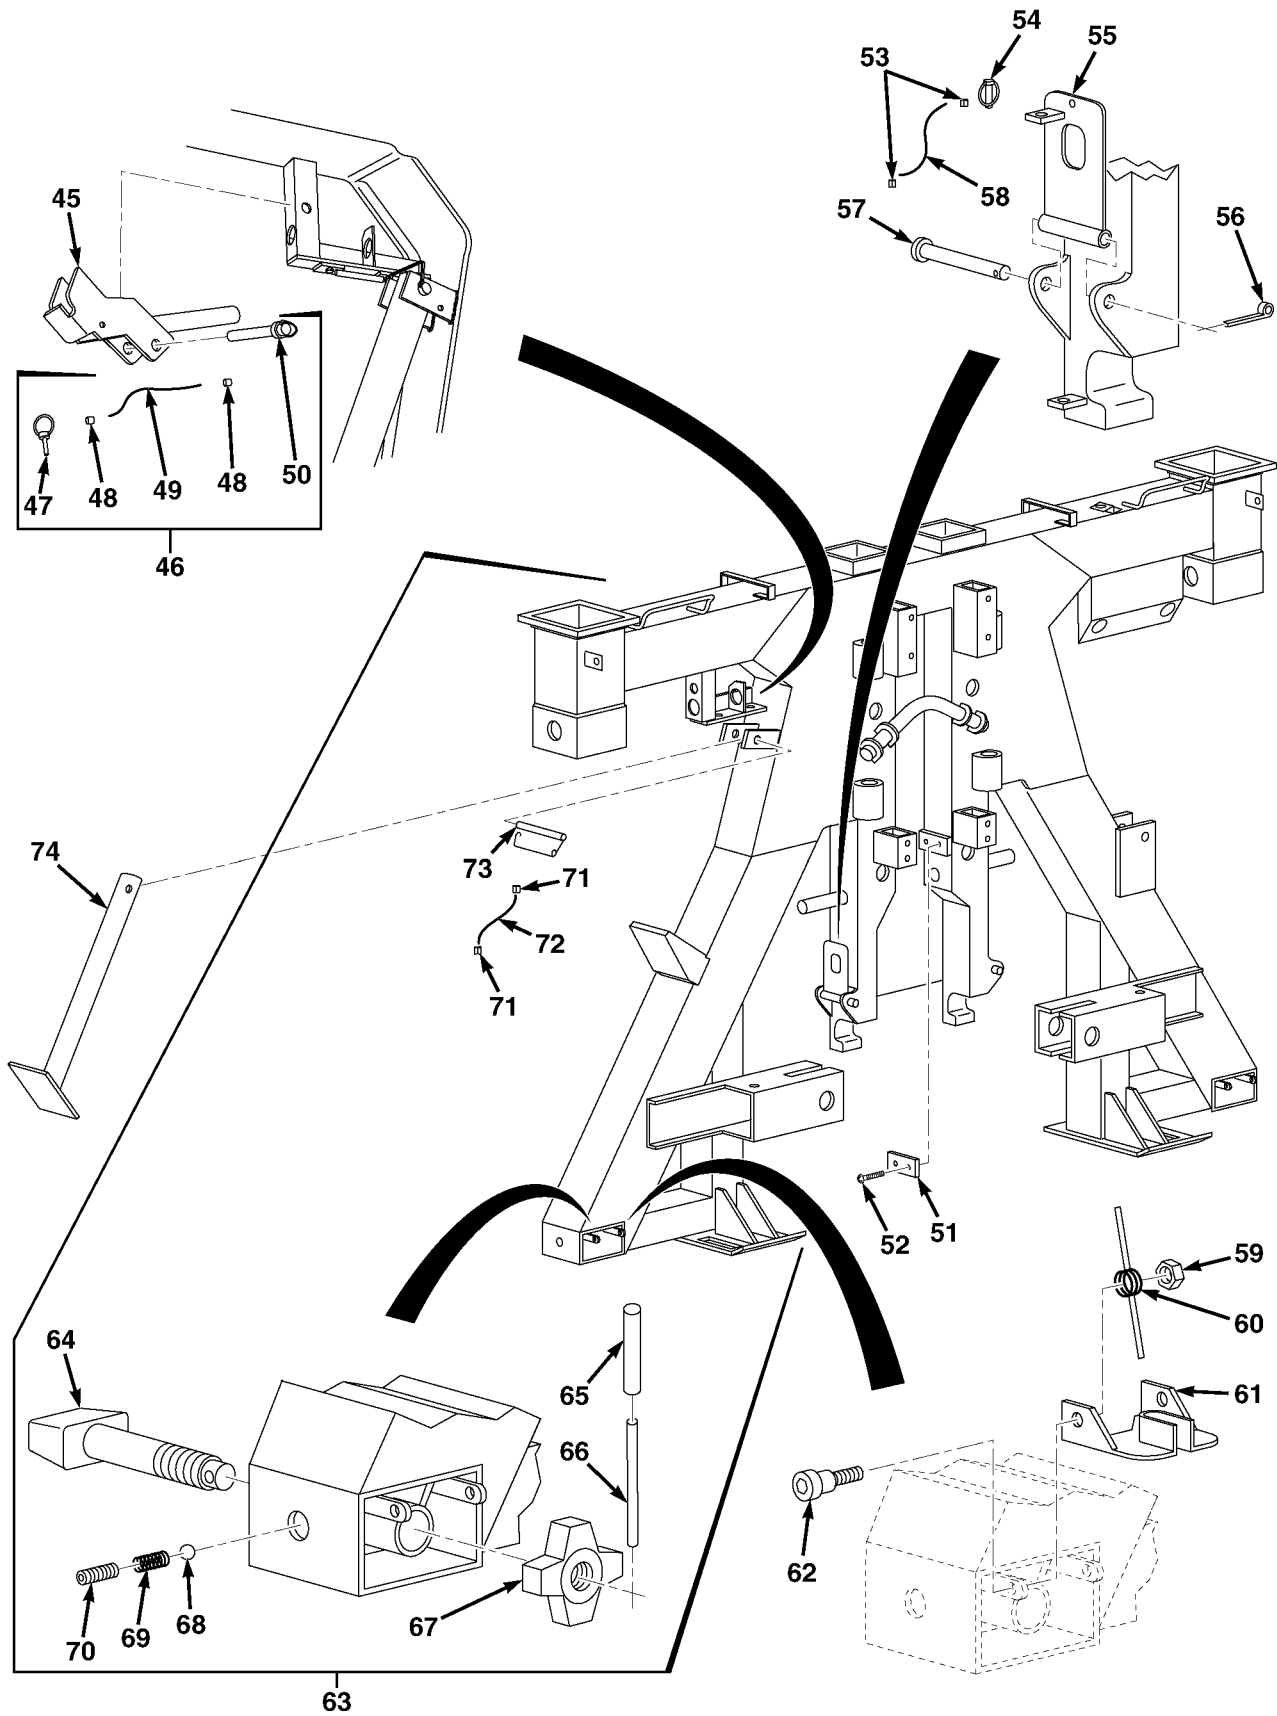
FRONT LIFTING ADAPTER (SHEET 2 OF 2)
